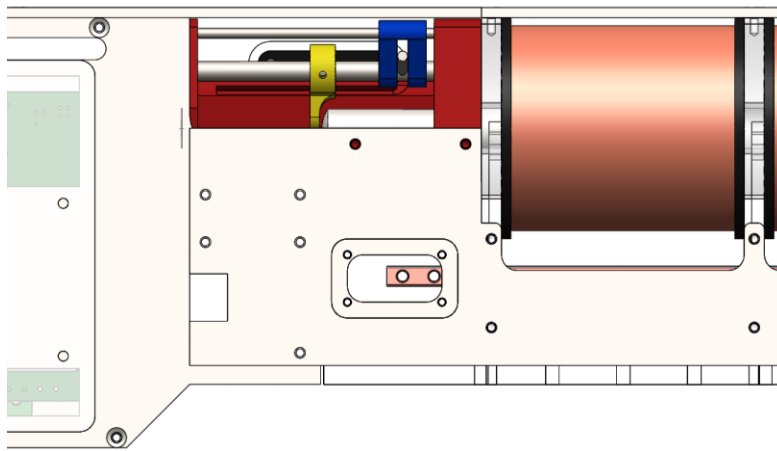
Connection of stock, loading mechanism, and barrel assembly. Fasteners and countersinks not visible. Colours added for clarity.
